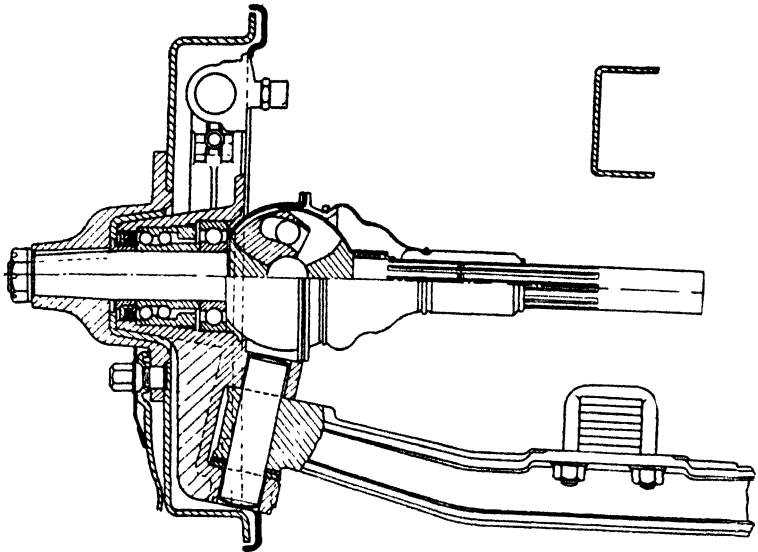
FRONT-AXLE END OF RUXTON FRONT-DRIVEN CAR.
